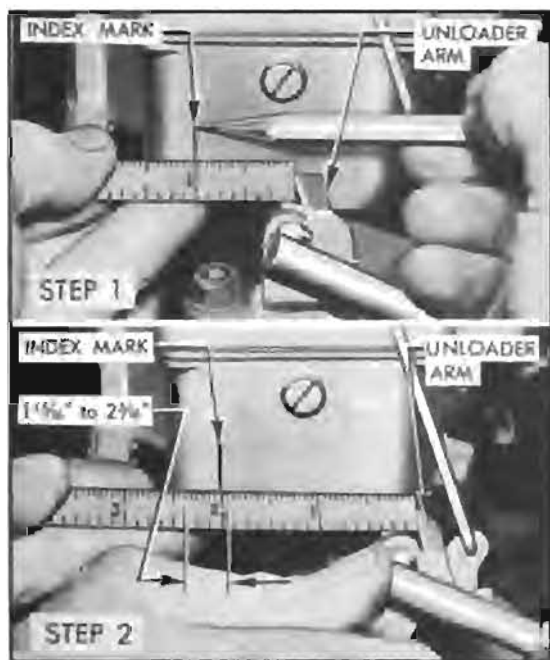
Checking Carter Accelerator Vacuum Switch Timing
